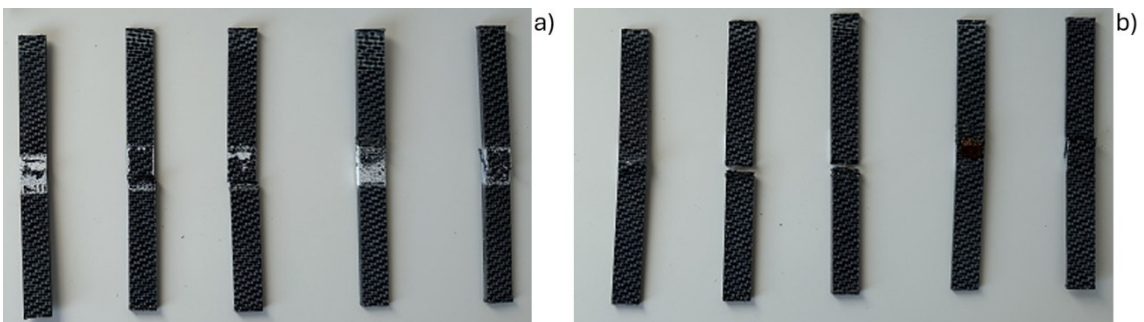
Failed compression test specimens in weft direction a) front face and b) back face
